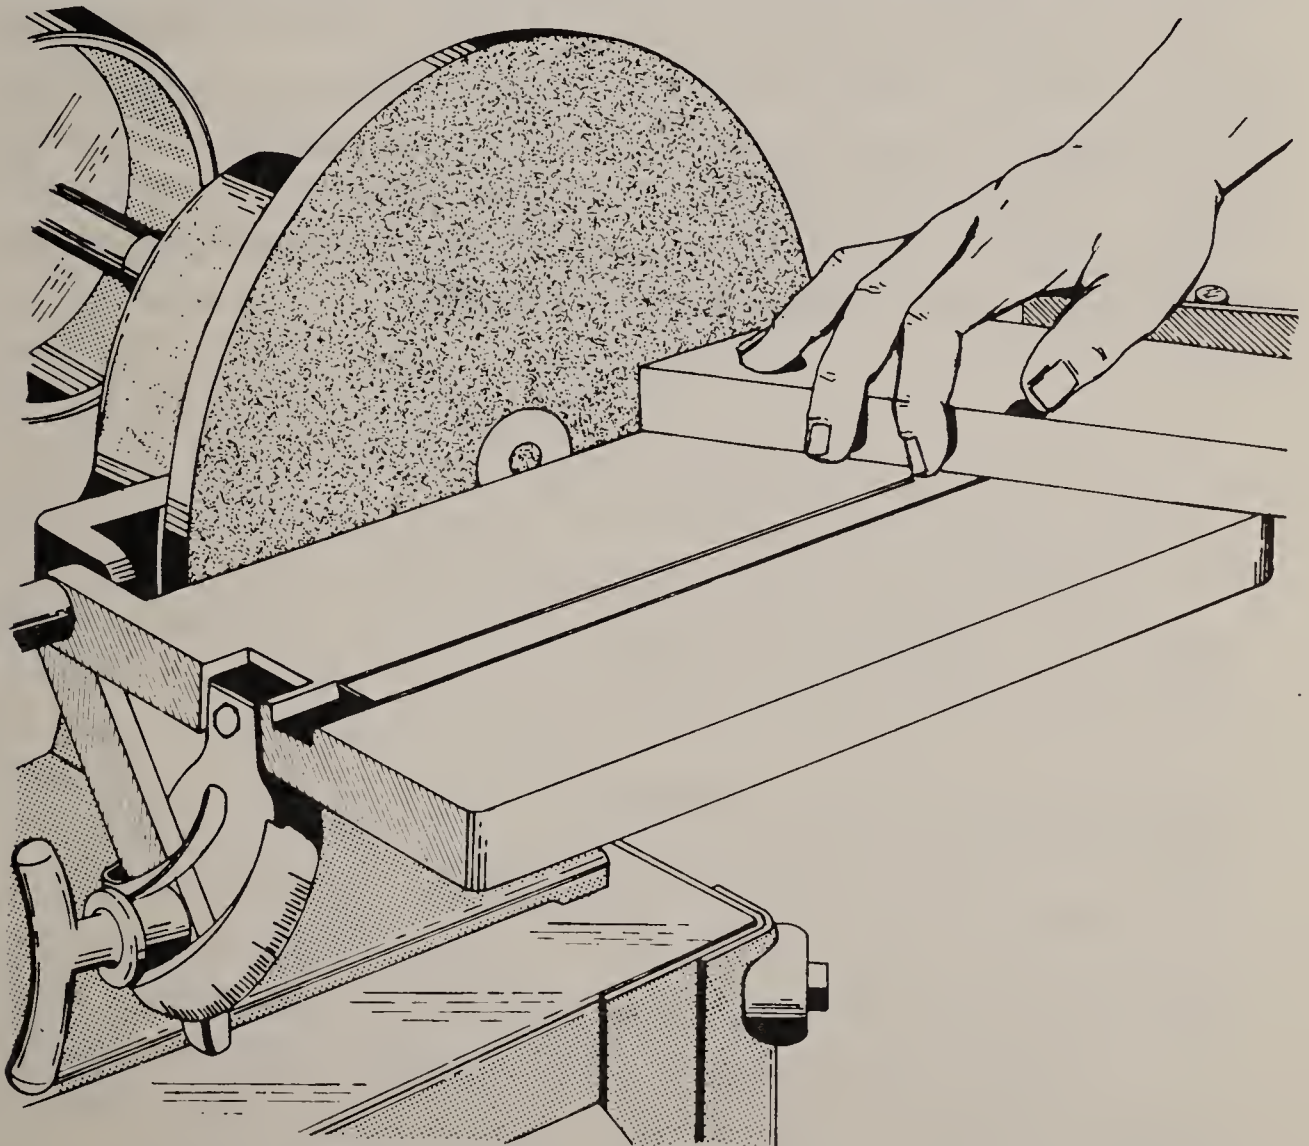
A disk sander being used to sand the end grain of a piece of wood.
